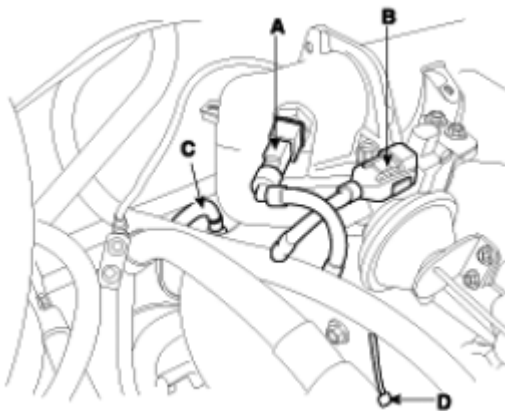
Identifying Power Steering Pump Switch With Oxygen Sensor (Rear 2nd) And VIS Actuator Connector
